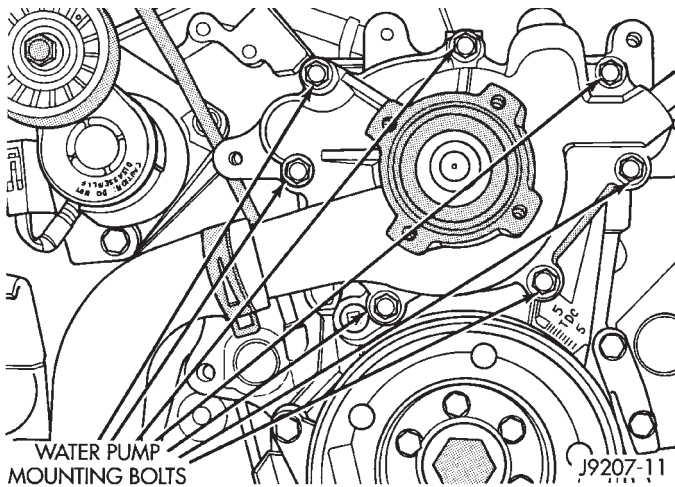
Water Pump Bolts—5.2L Engine—Typical
